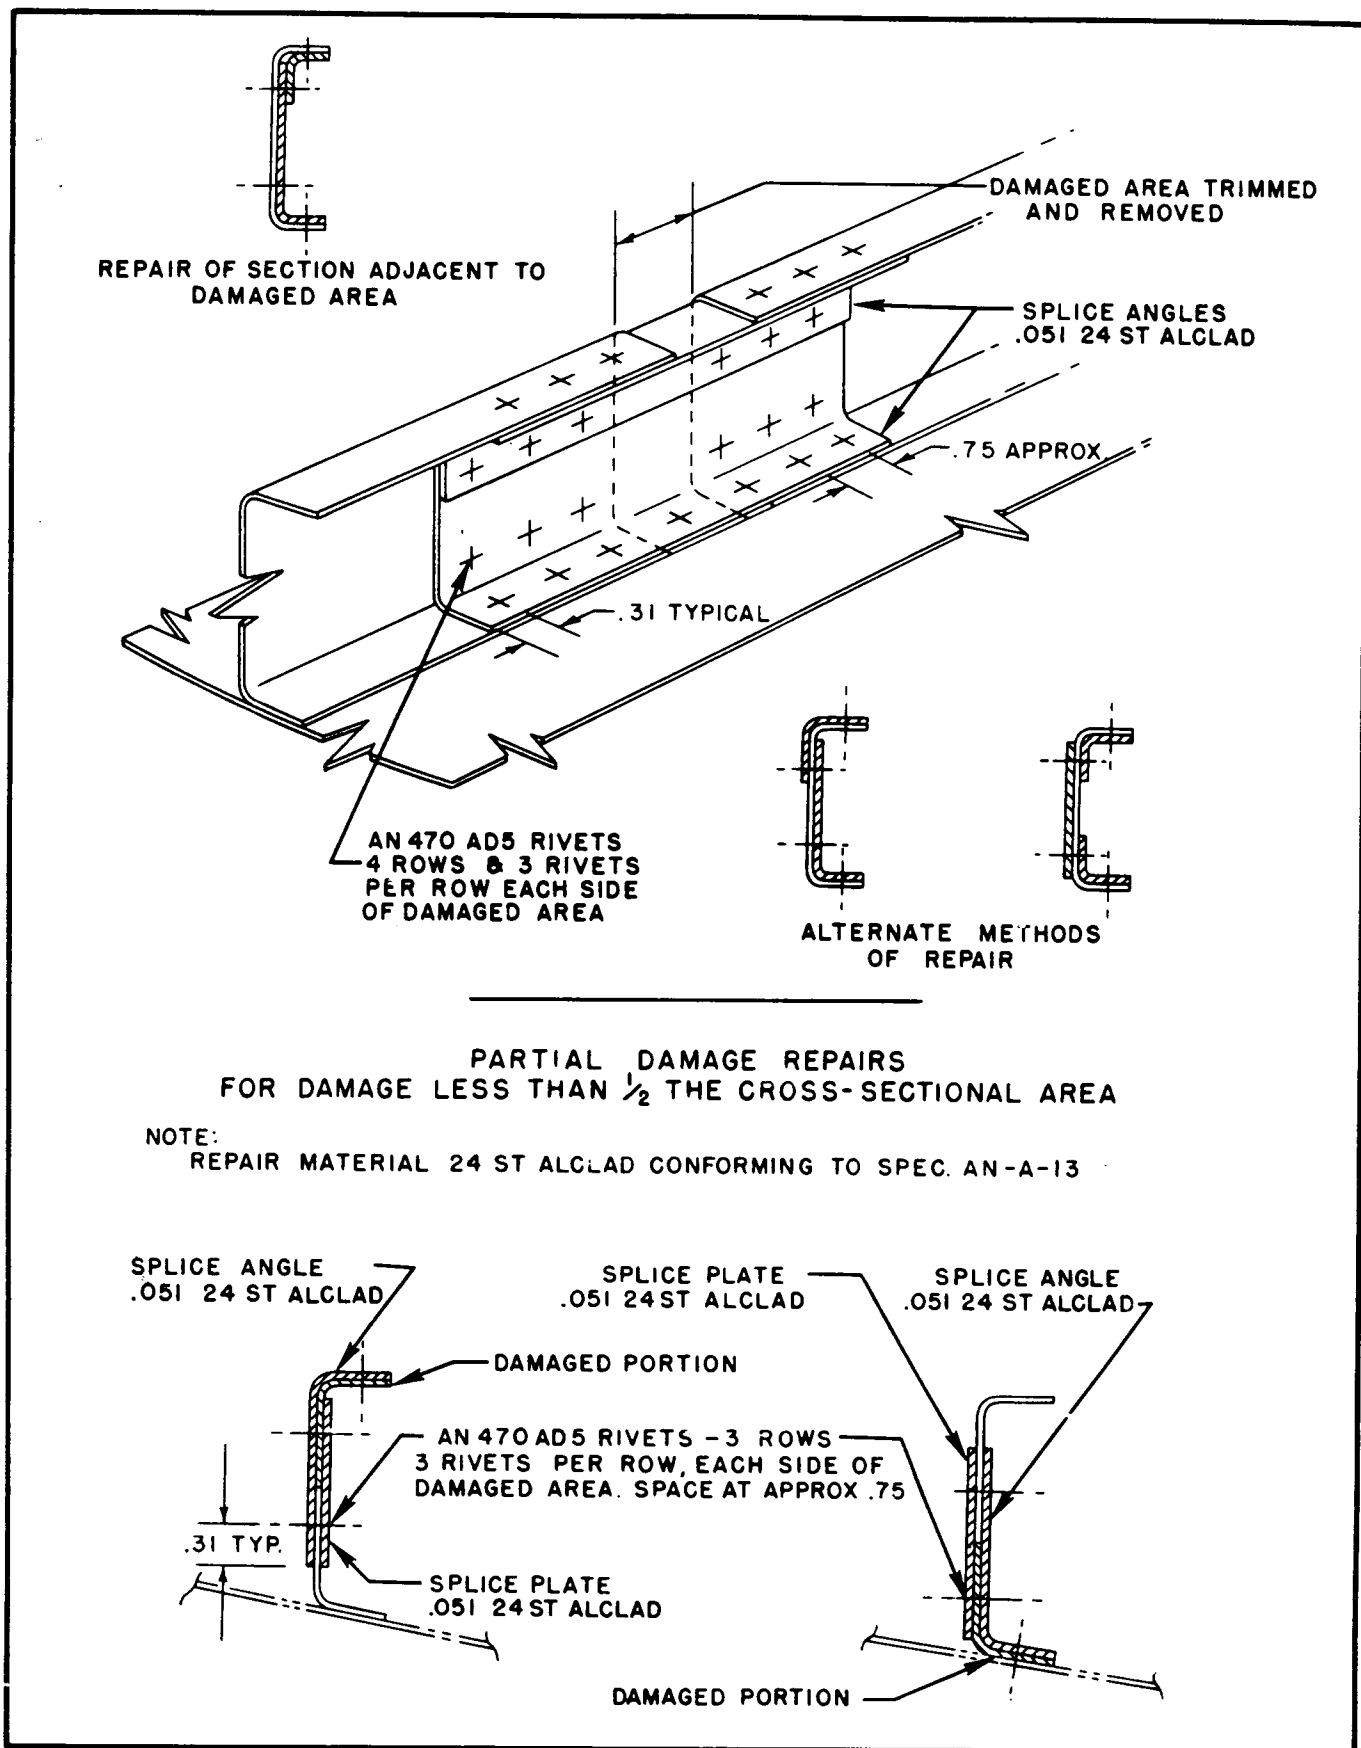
ENGINE MOUNT LOWER LONGERON REPAIR
